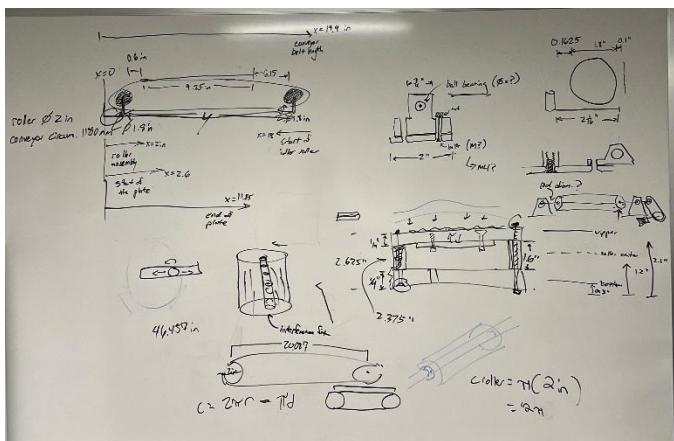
Figure D. Whiteboard from the middle design phase depicting more detailed drawings of the roller mount, roller rod, and hot bed support rod designs. Some rough dimensioning is included. Several sketches shown in Fig. (C) remain on the whiteboard.
